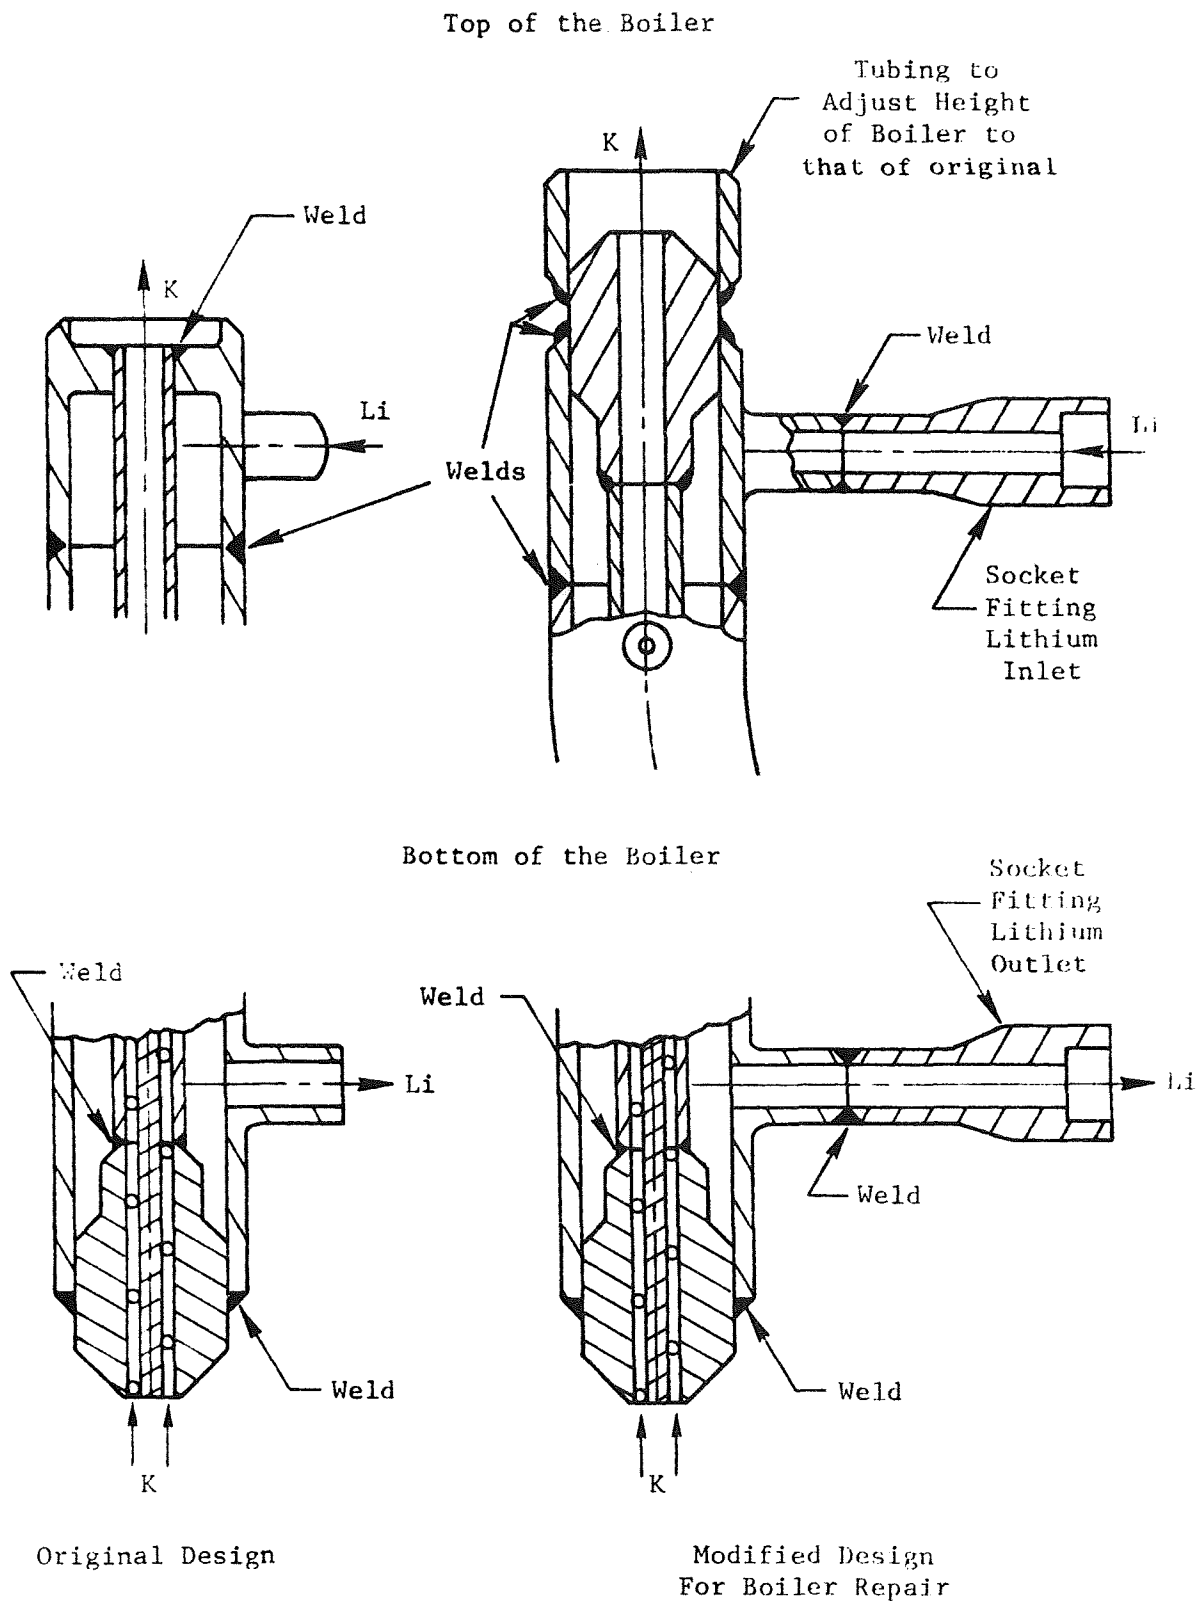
Joint Design at the Ends of the T-111 Corrosion Loop Boiler.
